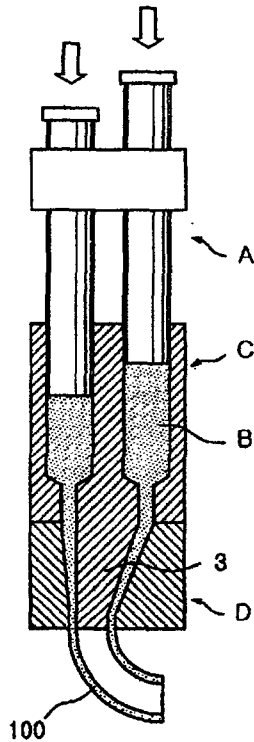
A cross-sectional view for the extrusion bending of the curved metal tube by pushing hot metal billets with each different velocity into the multi-hole container by extrusion punches;
